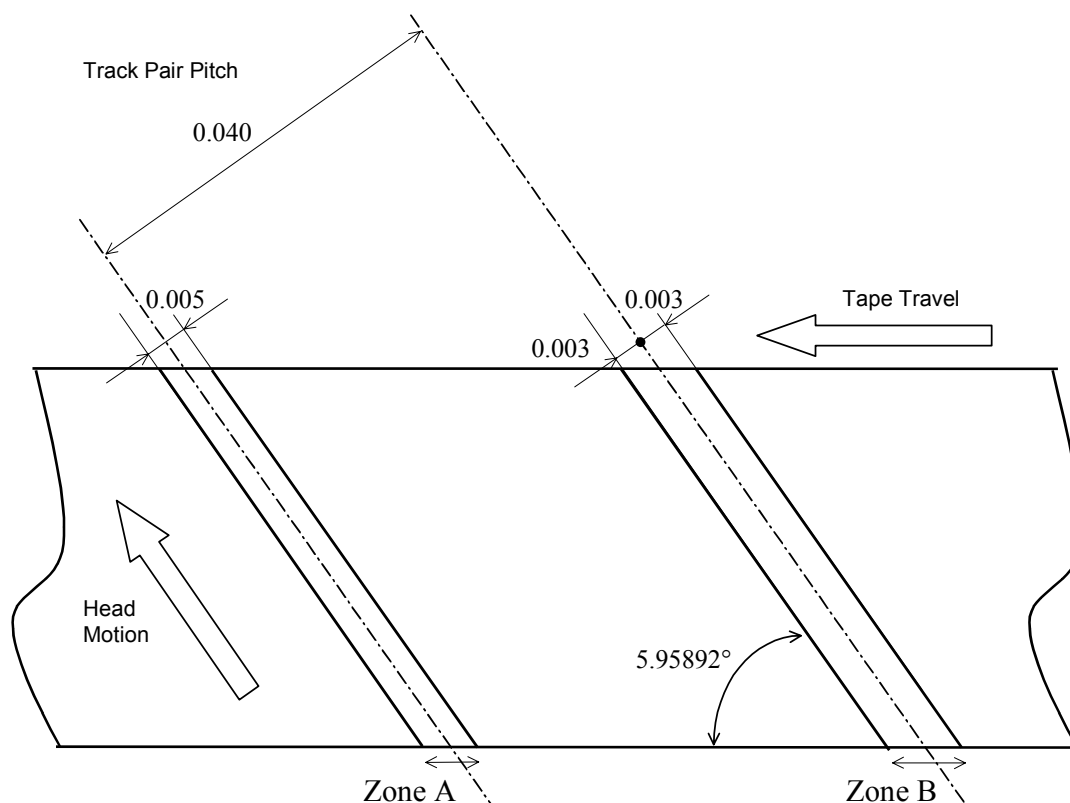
Location and dimensions of tolerance zone of helical track record
